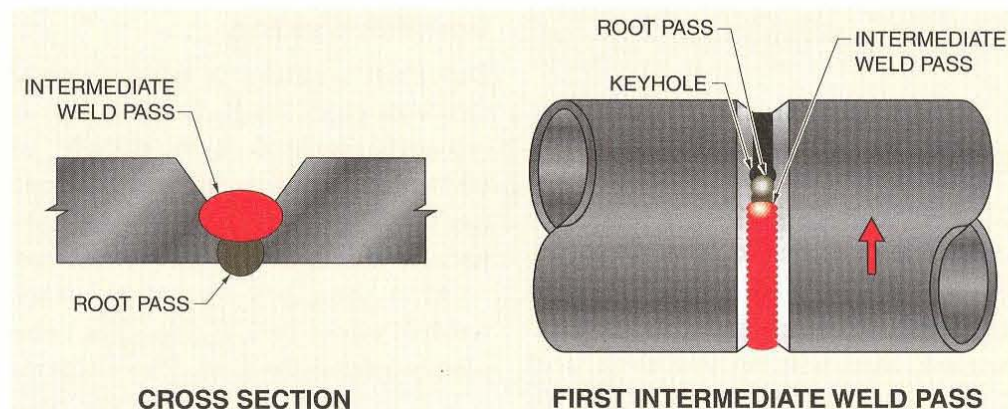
The first intermediate weld pass fills the undercut keyhole created by the root pass.
